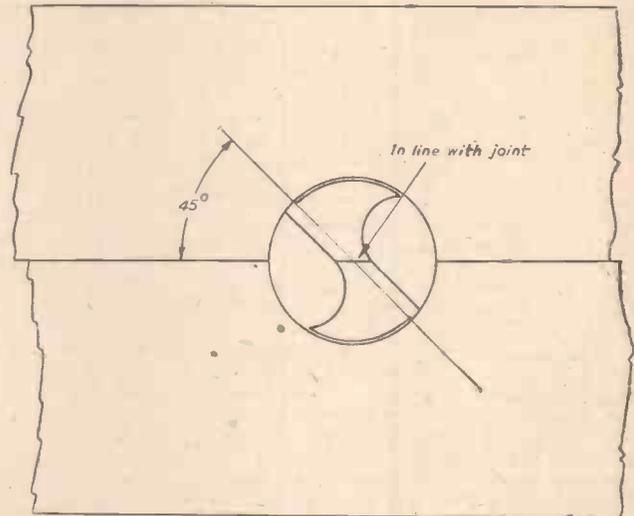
Showing the angle for mounting a drill in the clamp.
